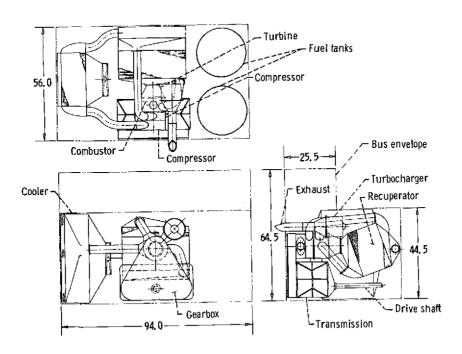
Engine layout for group III bus engine. Engine output, 400 horsepower (single shaft).
